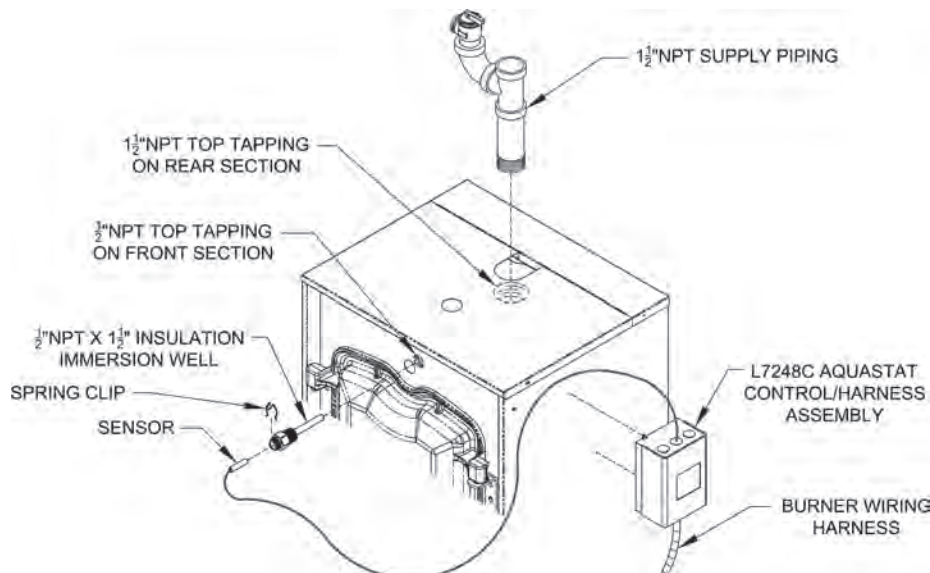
A: Supply Piping and Aquastat Control Assembly Details
